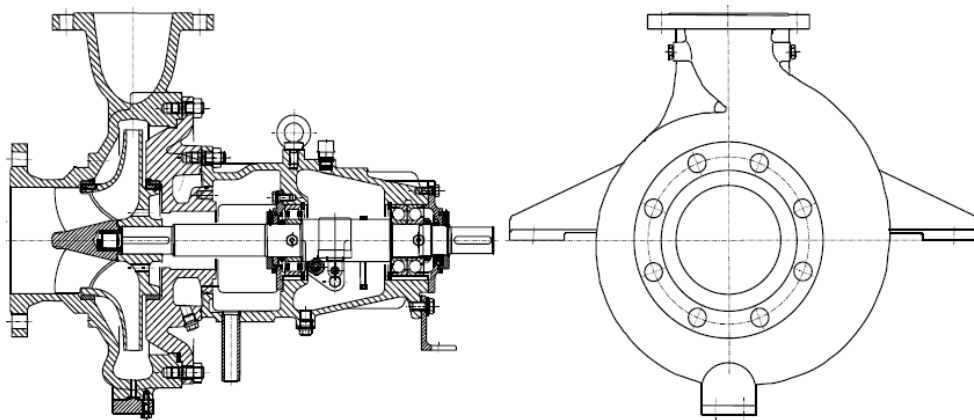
Single stage spiral casing pump with bearing unit, Sulzer Pumpen AG [4, p. 39]
